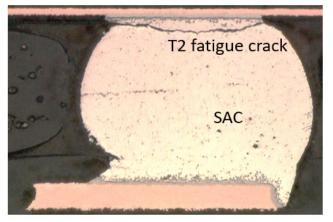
X-section image showing T2 crack due to ball shift phenomenon observed on both package and board side
